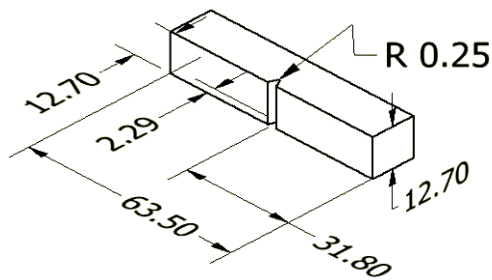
Impact test specimen as per ASTM D256 (All dimensions are in mm)
